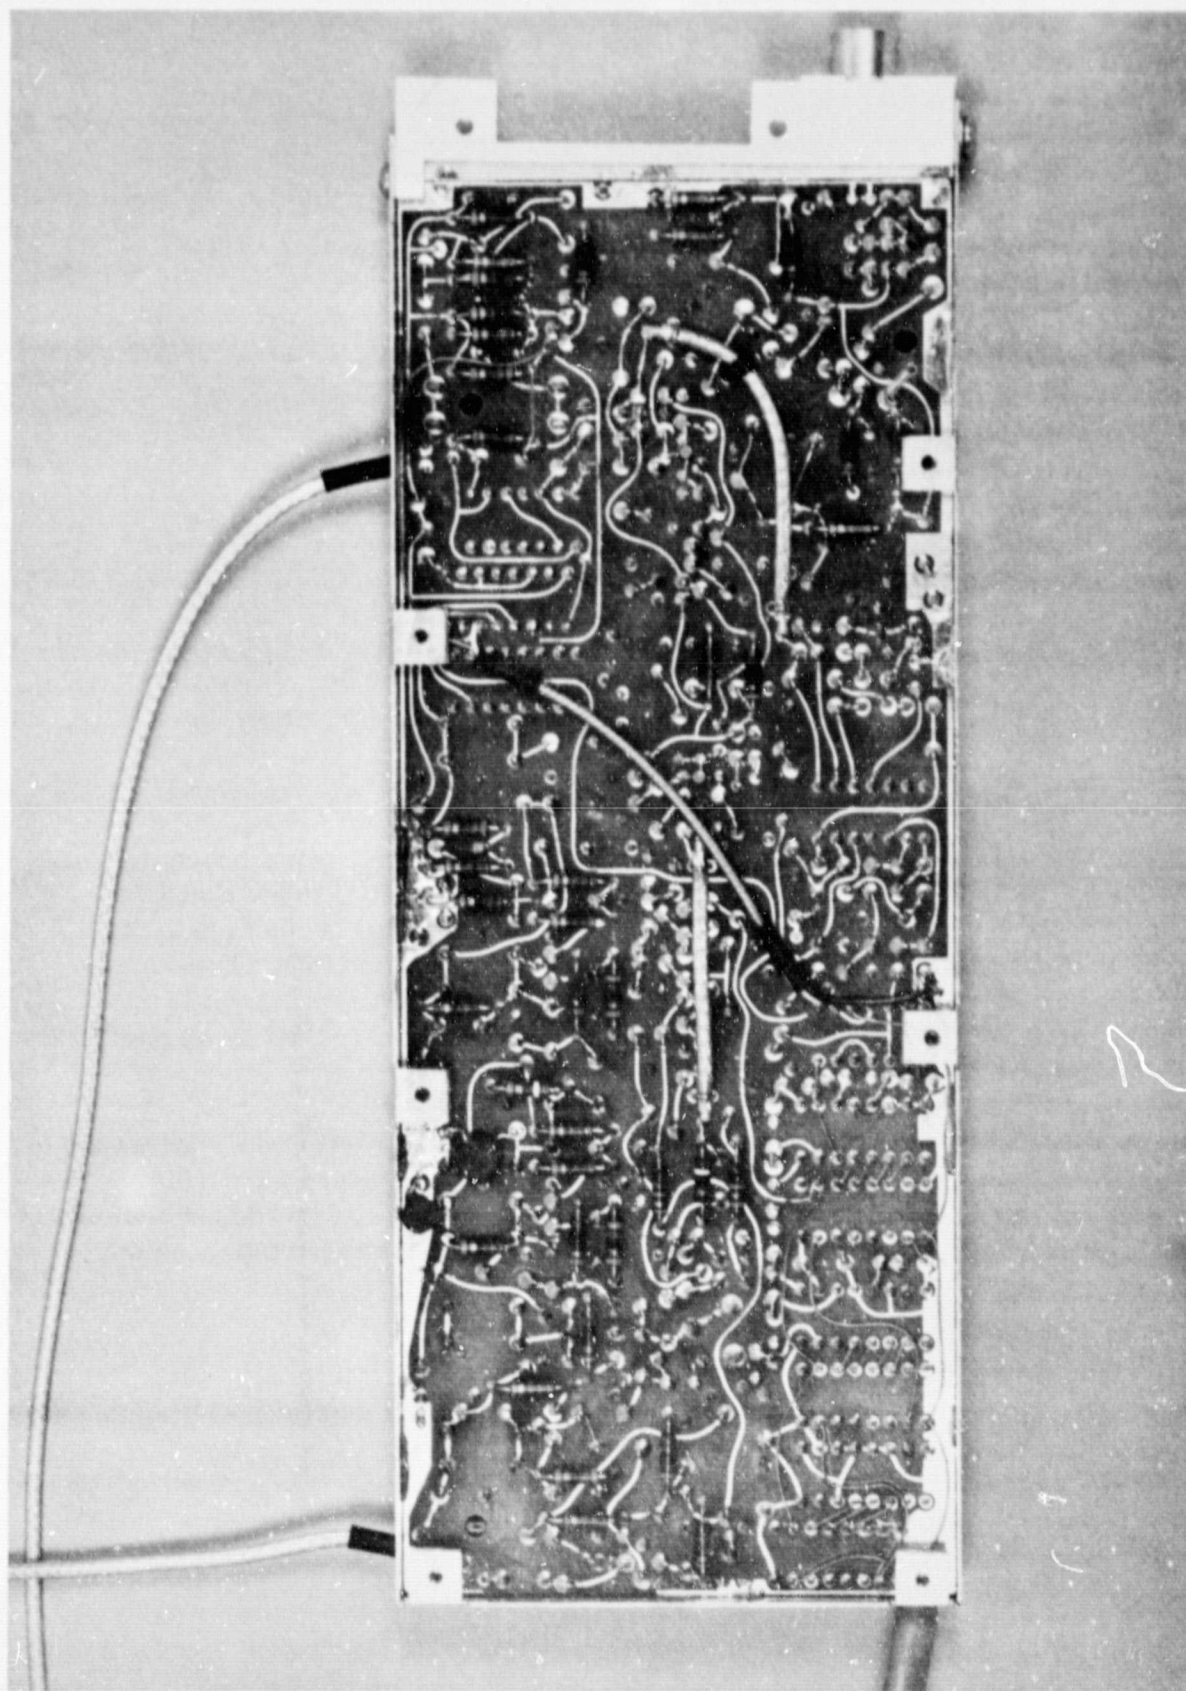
SYNTHESIZER BOTTOM VIEW
